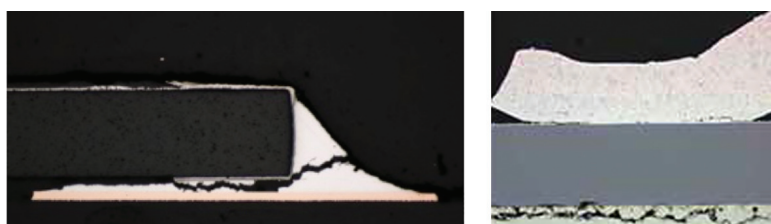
Example of Solder Cracking and Wire Bonding Crack
